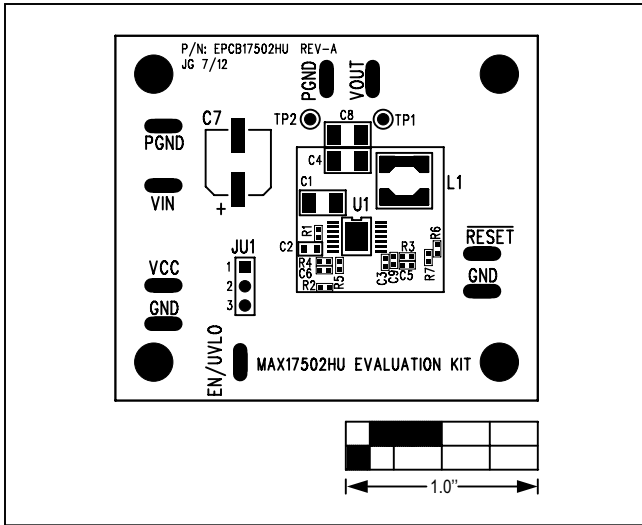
MAX17502H EV Kit Component Placement Guide—Component Side
